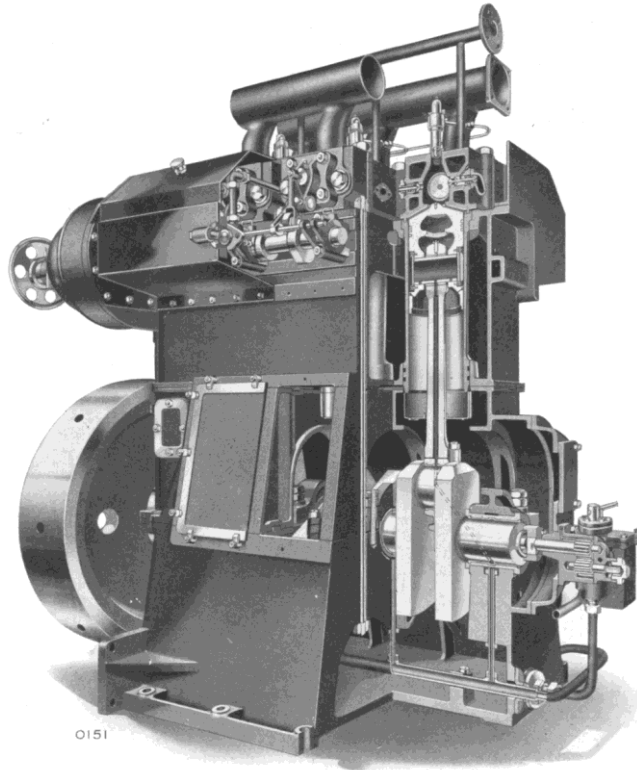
Sectional view of a Paxman Heavy Duty Diesel Engine
